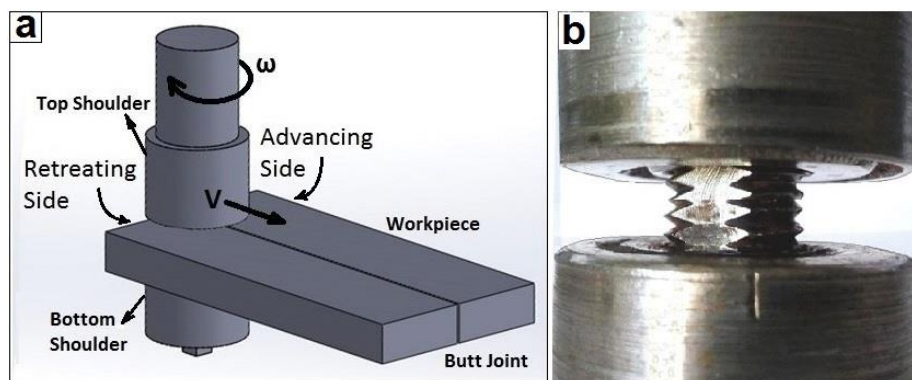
(a) Schematic of the BFSW process, (b) Geometric features of the bobbin tool.
